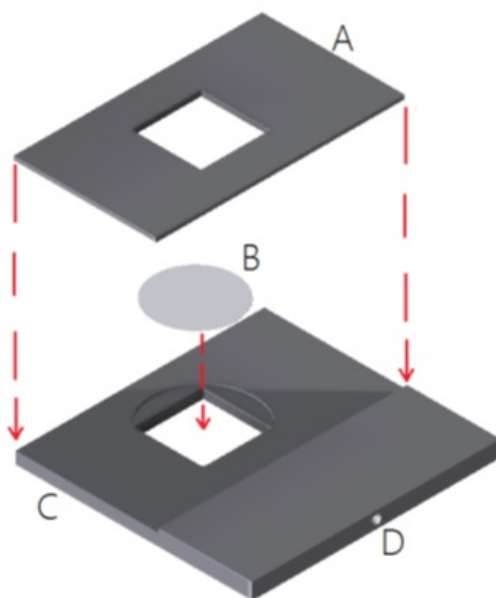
Filter drawer. The holder (A) fixes the Millipore filter (B) to the drawer (C). A standard 3 mm threaded hole (D) allows to easily extract the drawer from the RaDoM.
